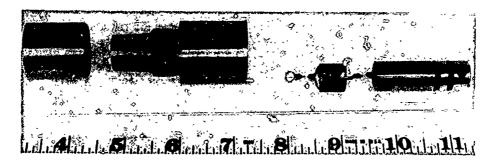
Bottom end fitting with compression nut and line termination showing insulator and O-ring seals
